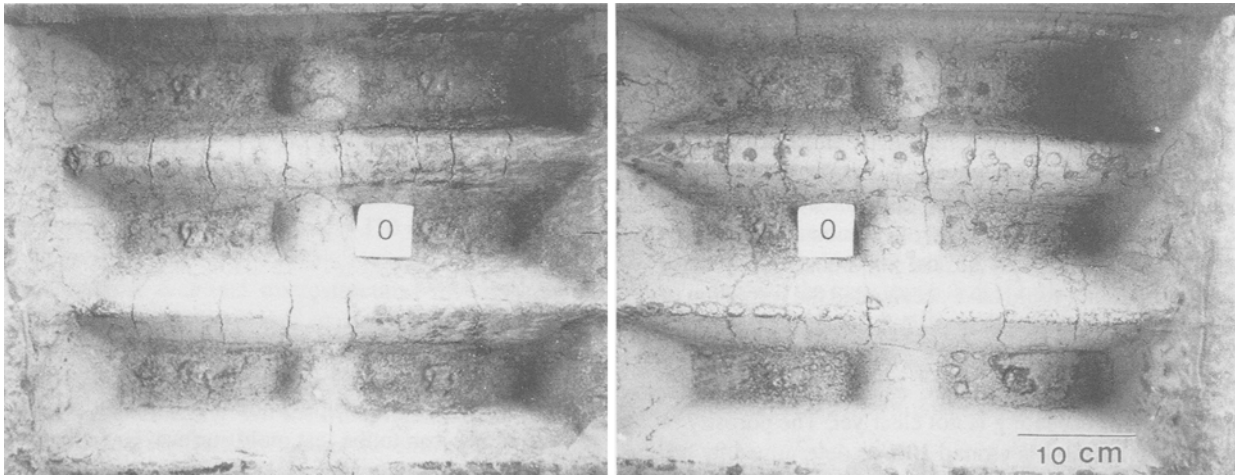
Typical surface morphology of field tested mold specimen showing many vertical cracks
